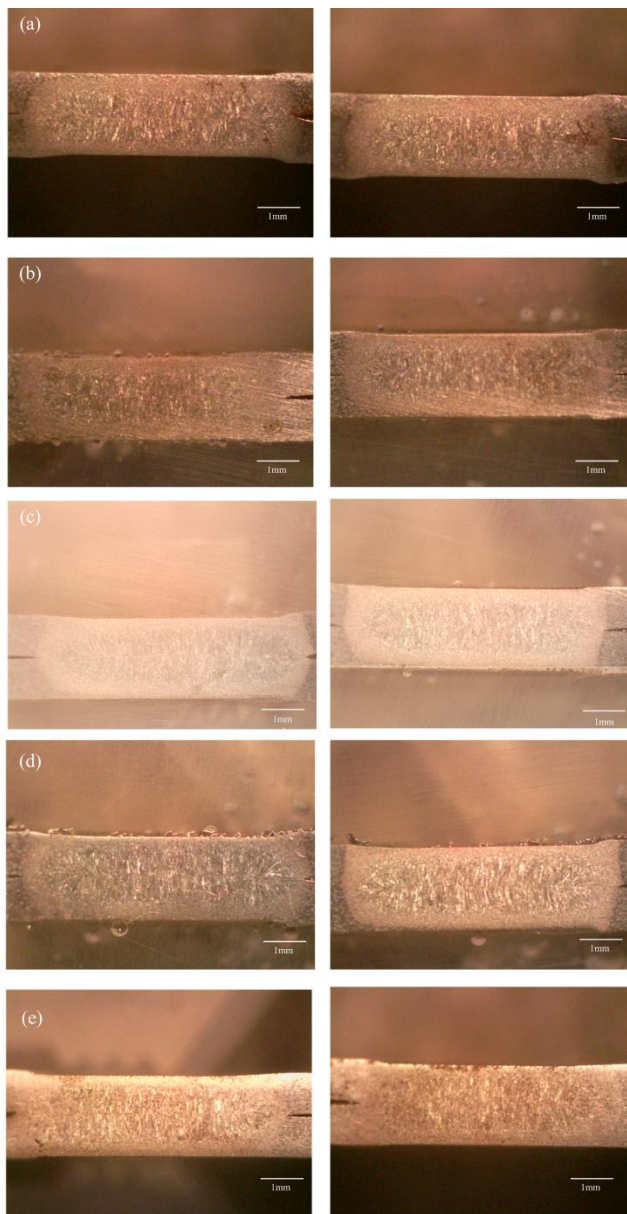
Longitudinal-sectional views of shunt welds and first single shunted welds. a) 8 mm. b) 12 mm. c) 15 mm. d) 24 mm. e) 30 mm
